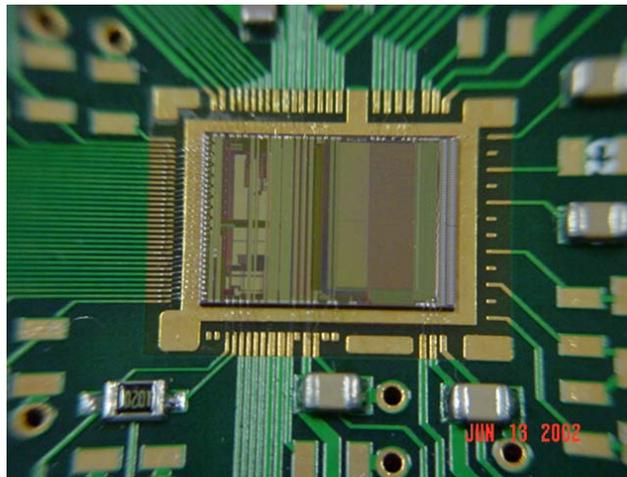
The photograph of the prototype SVX4 chip mounted on chip carrier board.
